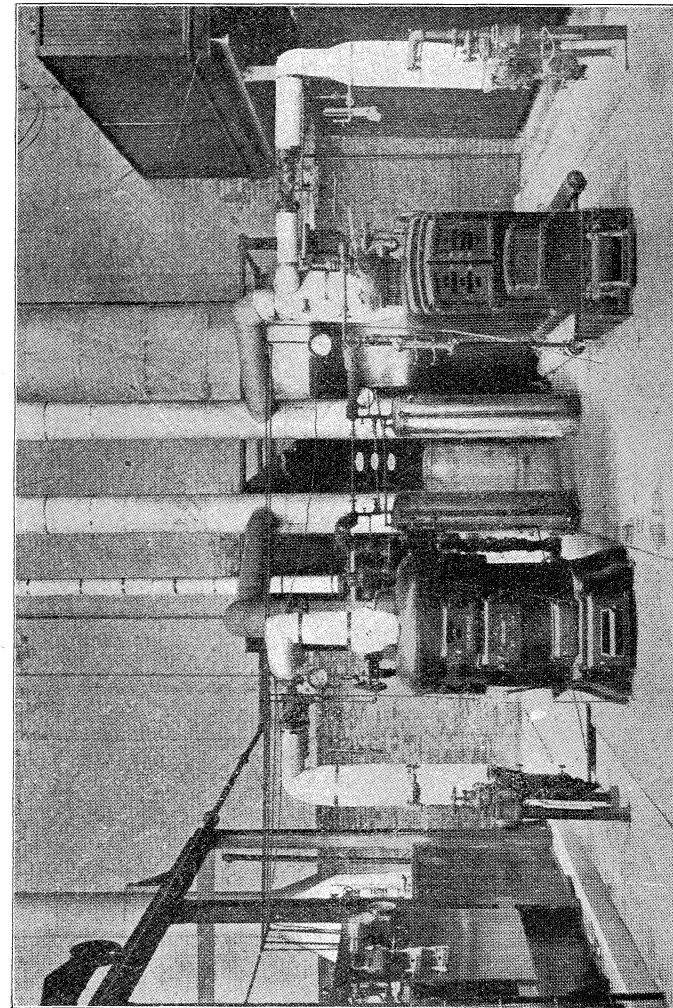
HOUSE HEATING BOILERS, TESTING FLOOR
